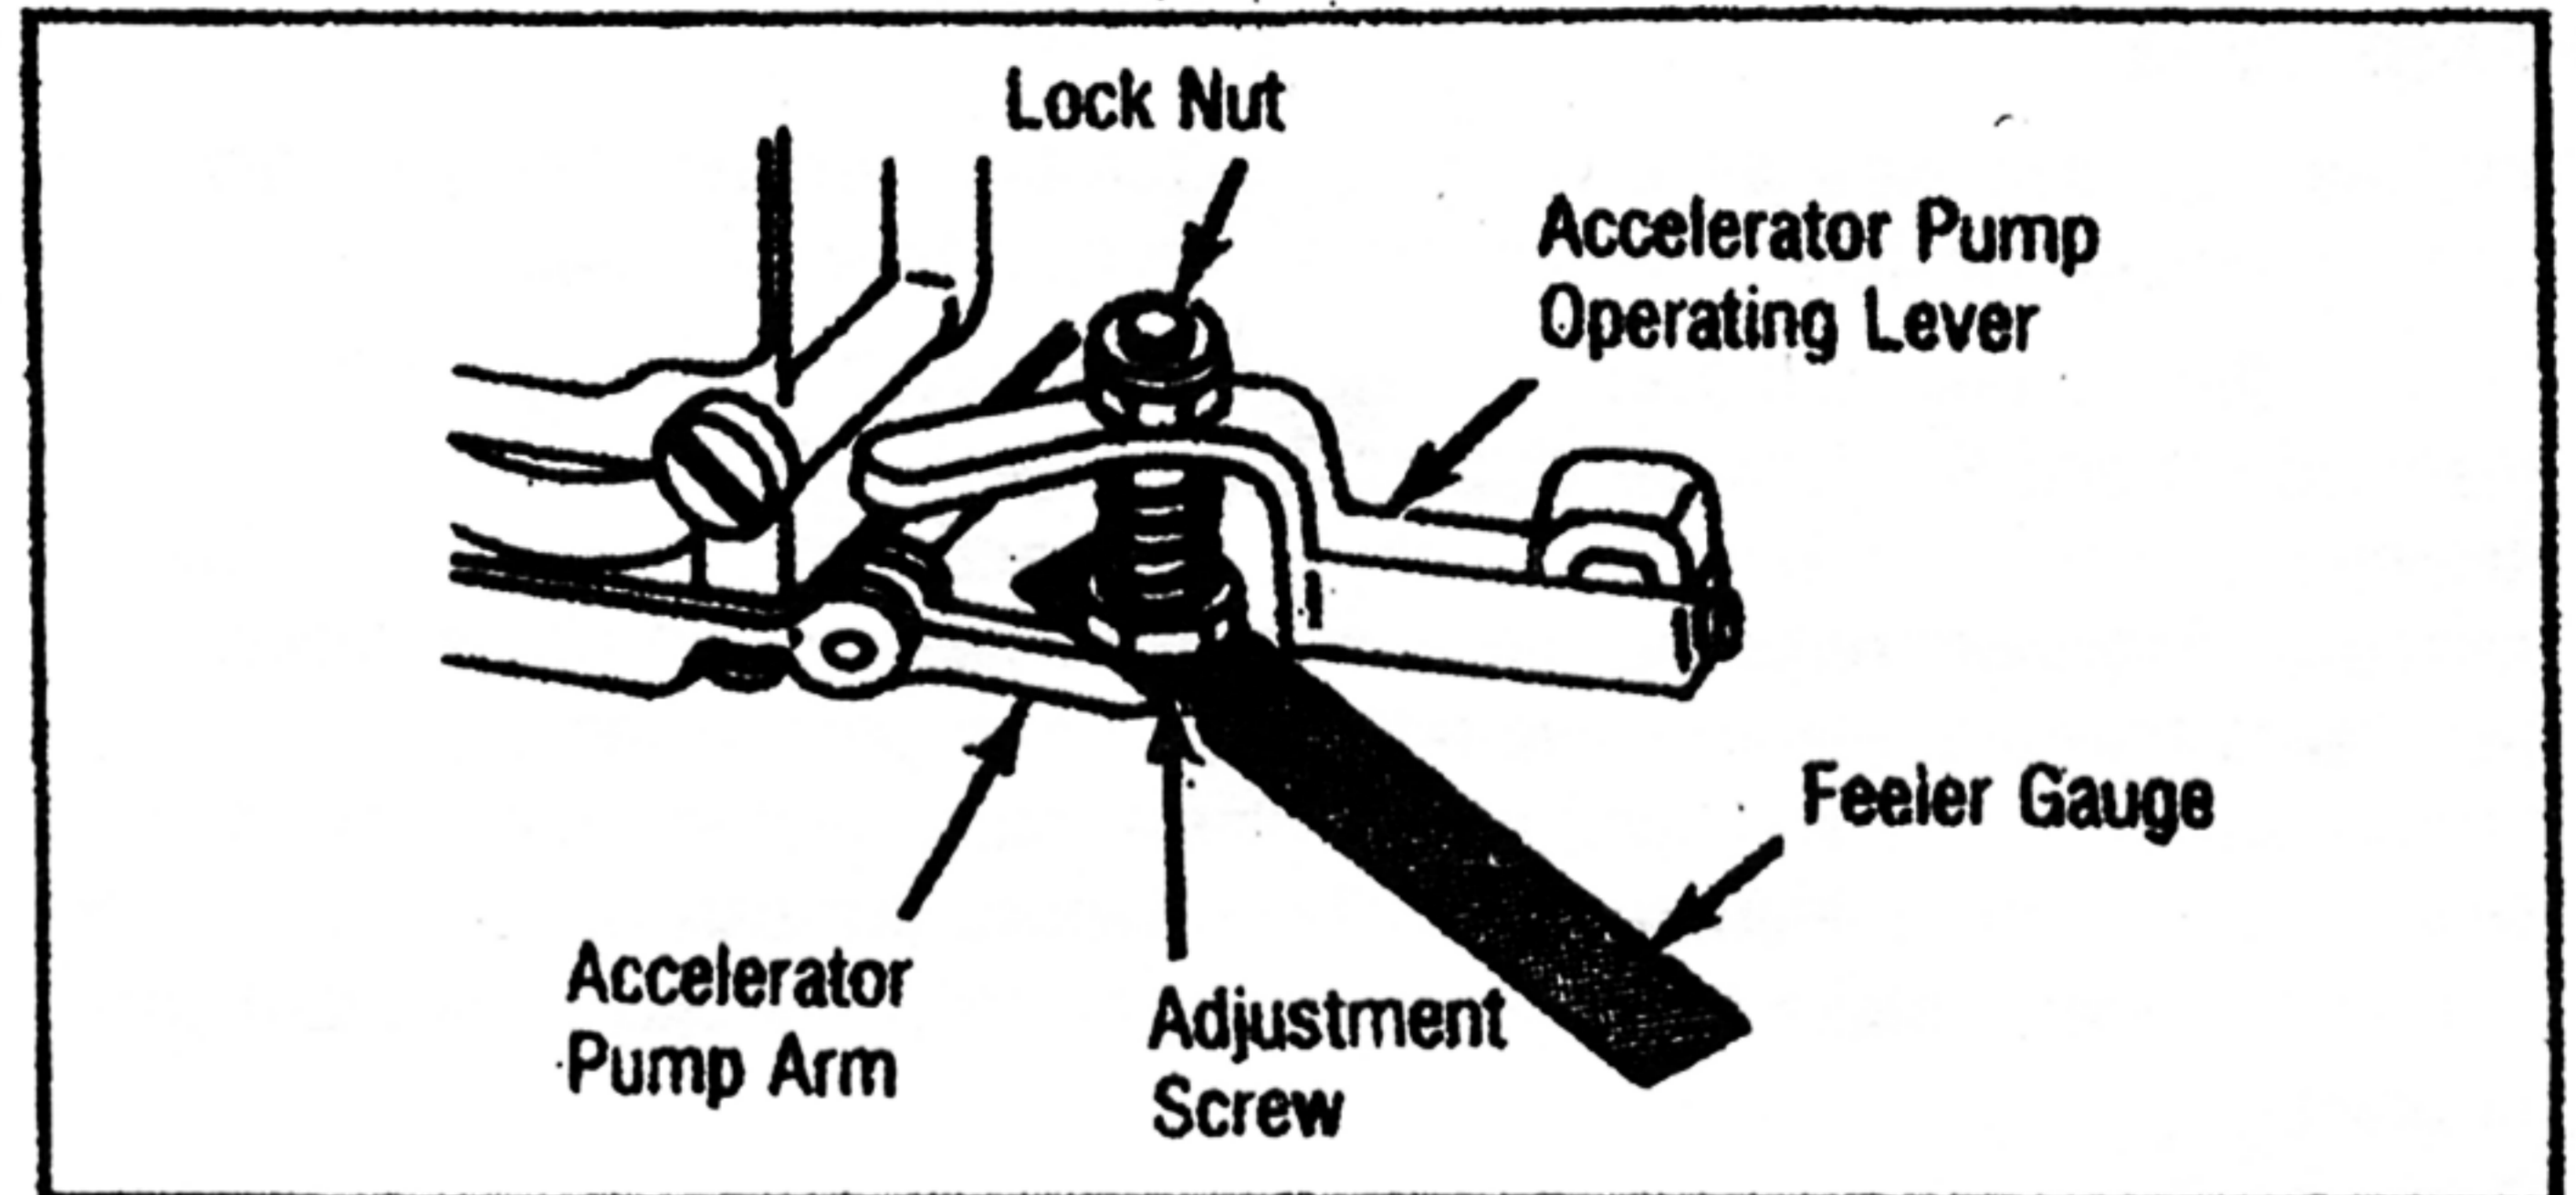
Accelerator Pump Lever Clearance Adjustment
